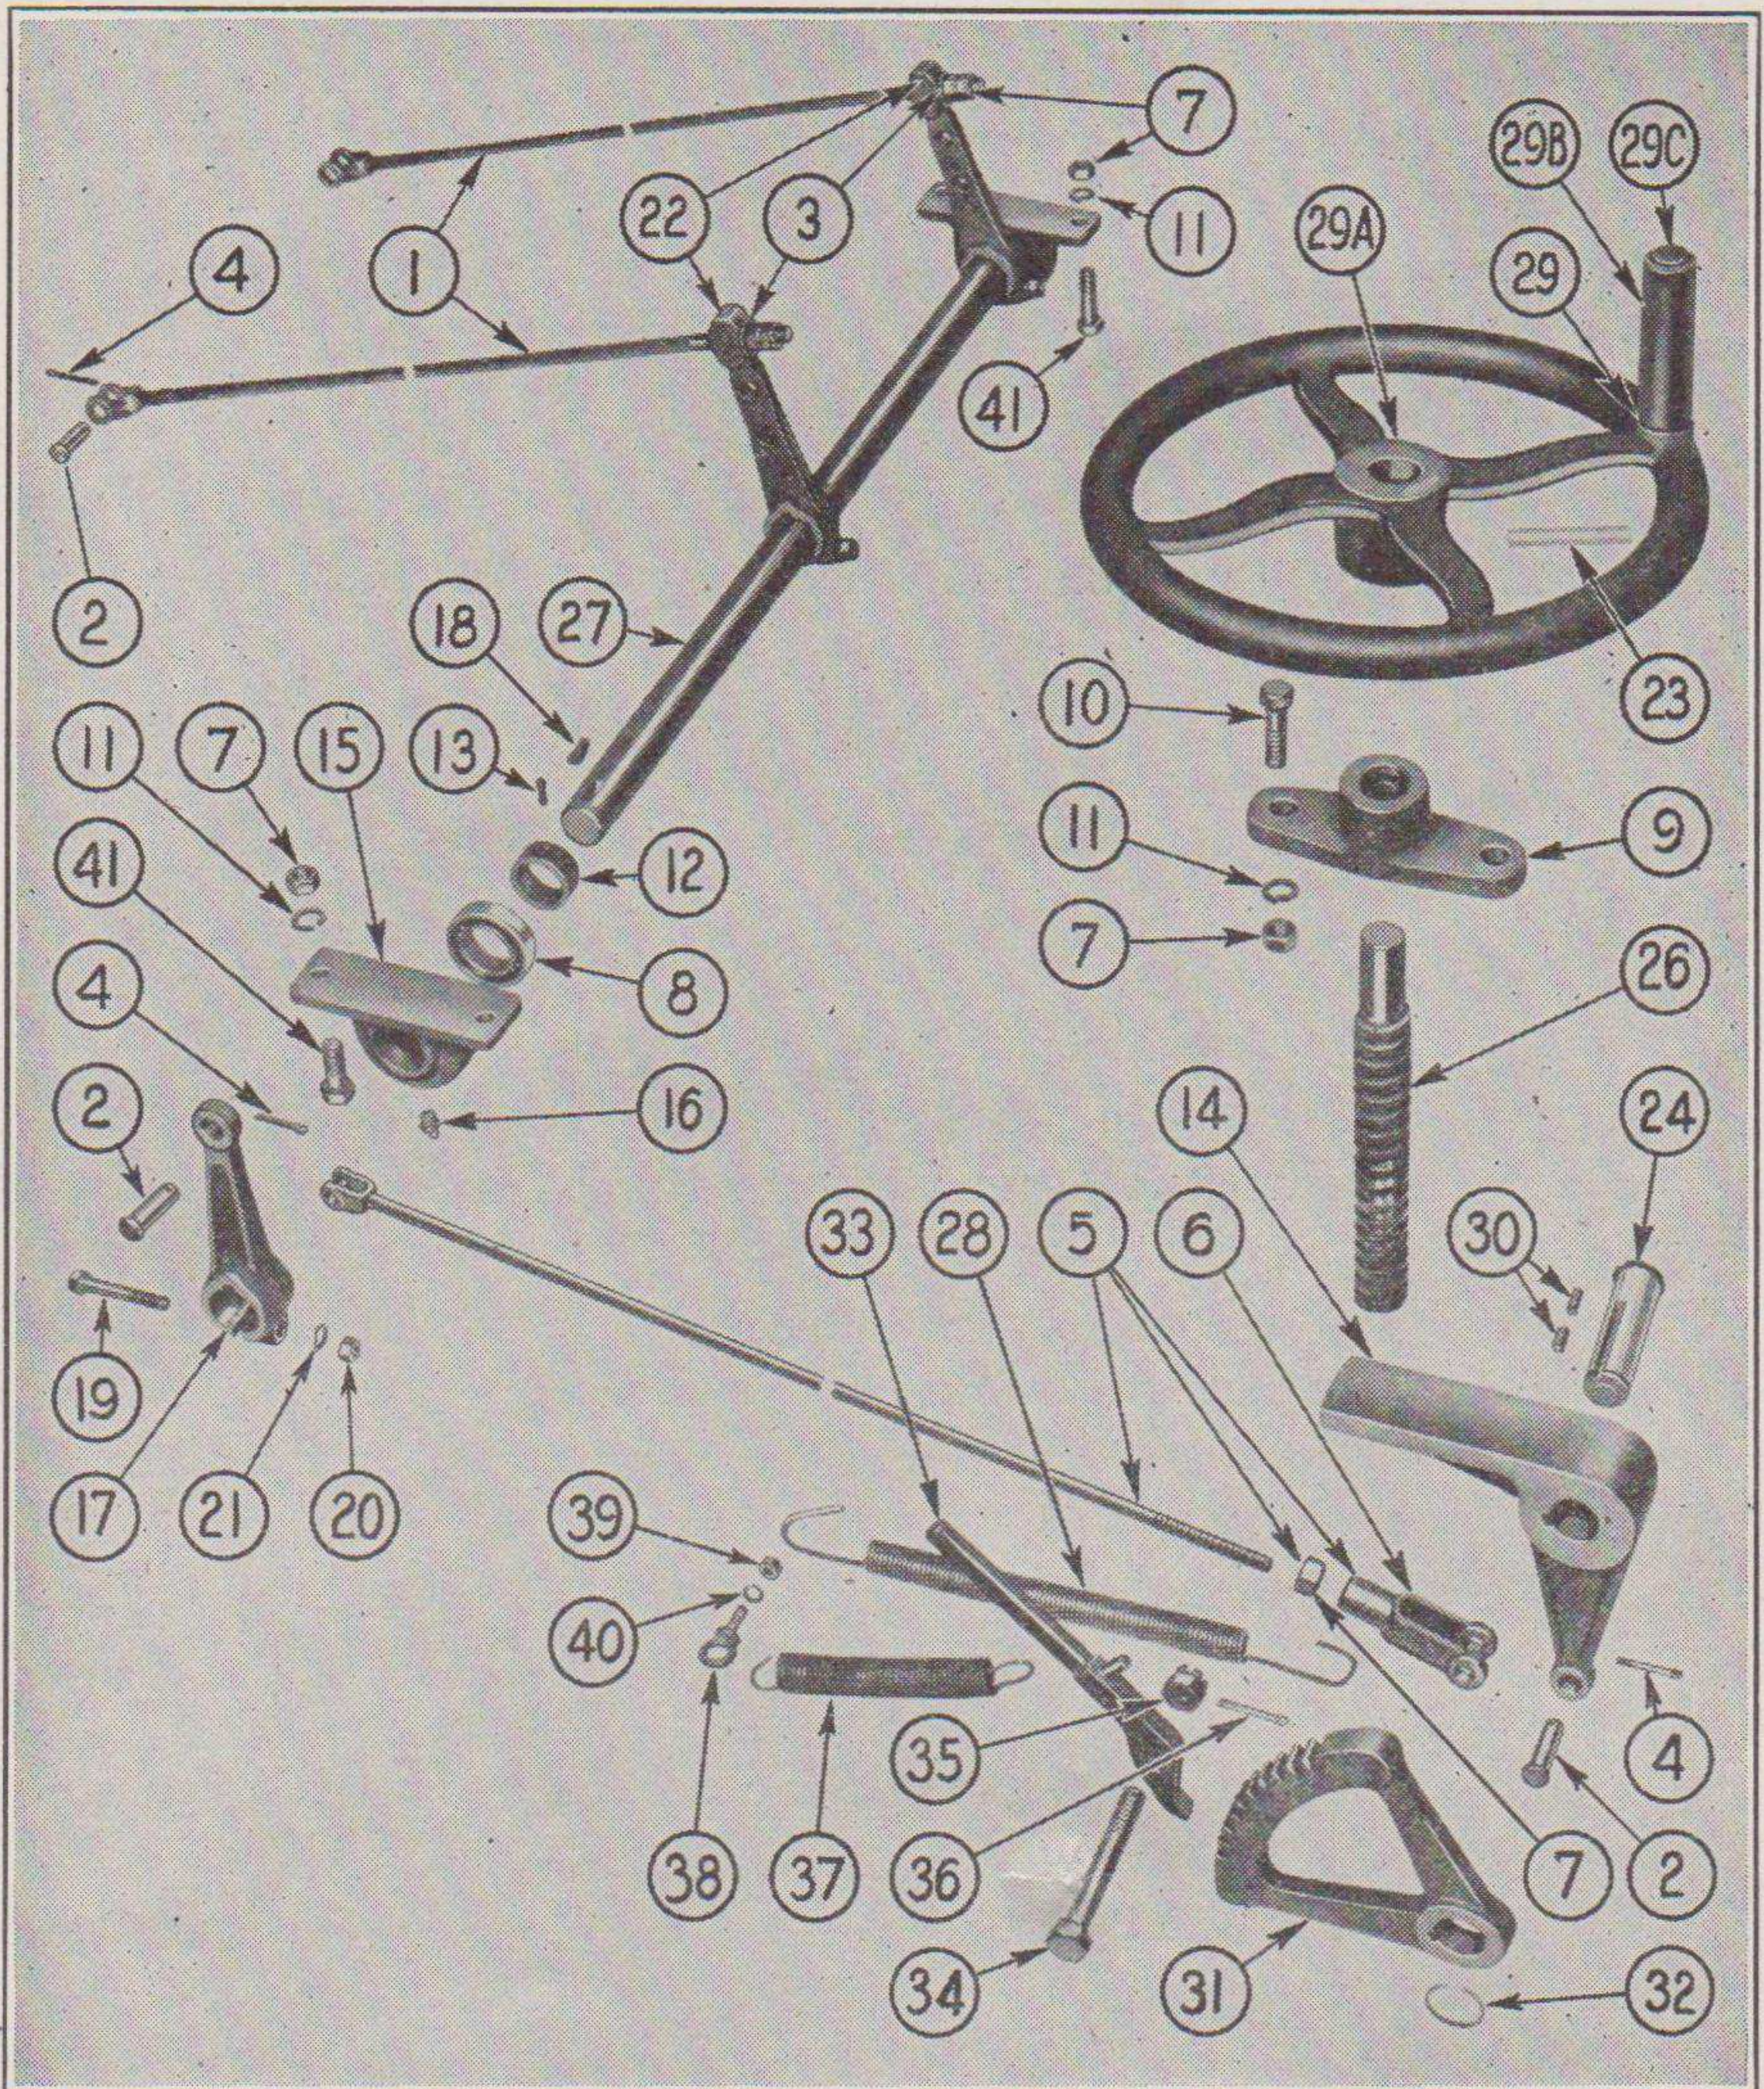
HAND PARKING BRAKE ASSEMBLY
